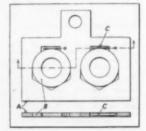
Turn-over Axture employed to hold small cylindrical parts, such as washers, while grinding both sides on an abrasive-belt machine.
